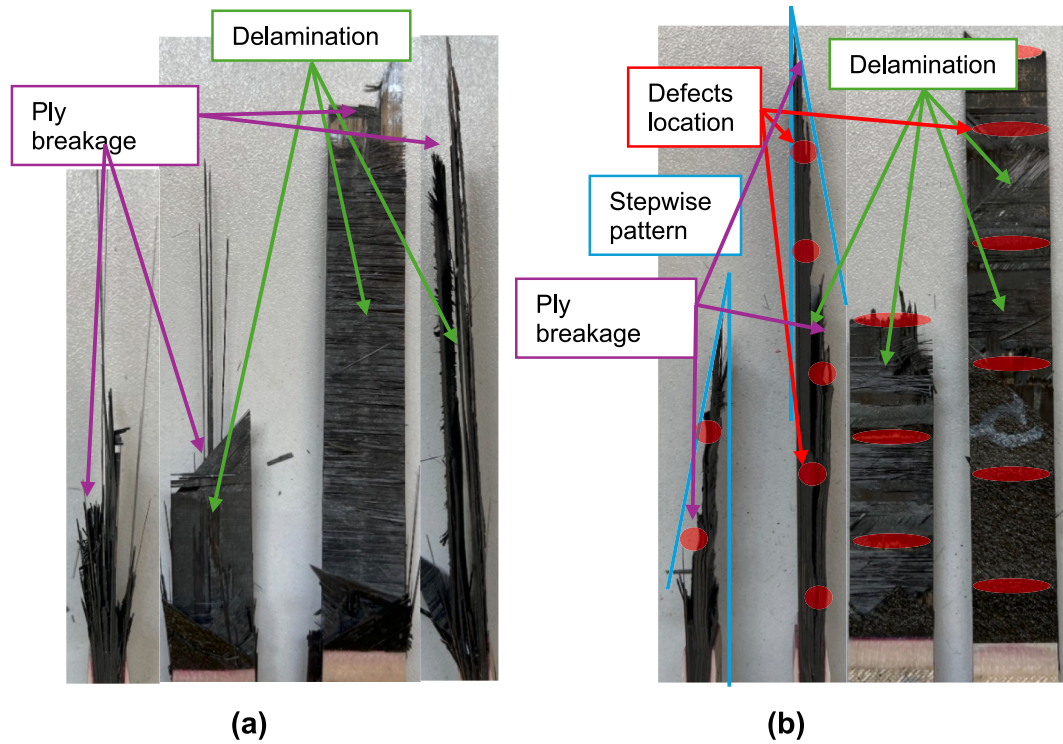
Specimen after fatigue: (a) defect-free and (b) with defects.
